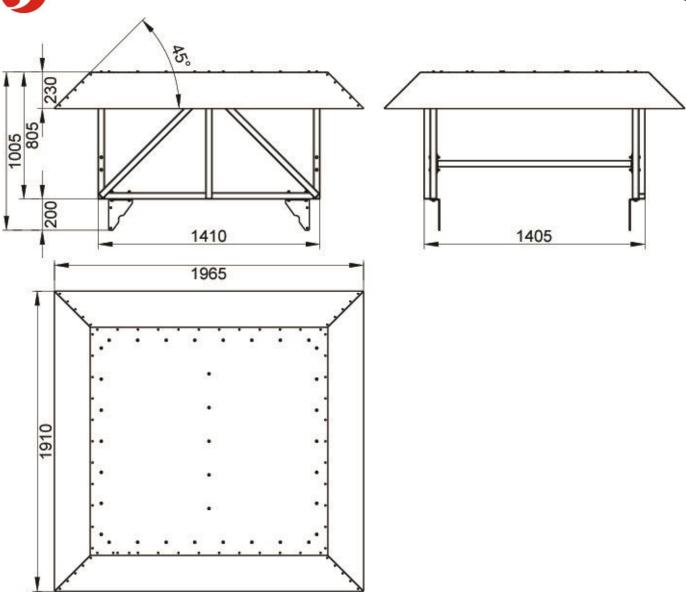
Additional element - Fan cover OW-UFO-A-5000 - fan cover to be installed on the device
